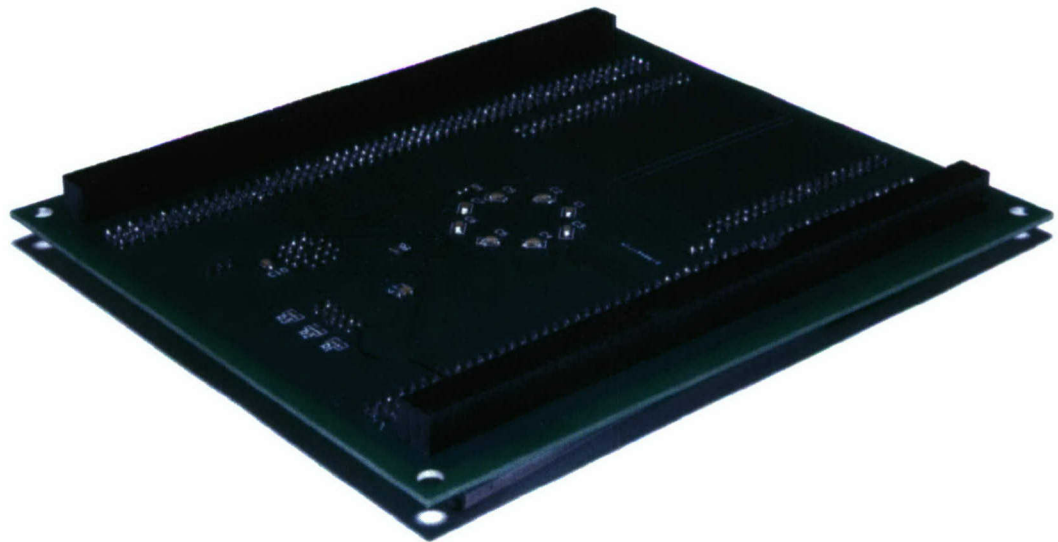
Bottom view of a partially assembled main board prototype showing the two sets of black female headers where the main board will connect to the API and PCU on the special radar backplane.
